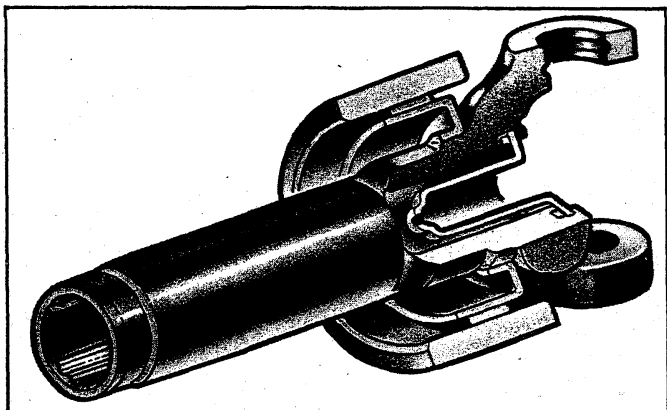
Propeller Shaft Sleeve and Damper Assembly
